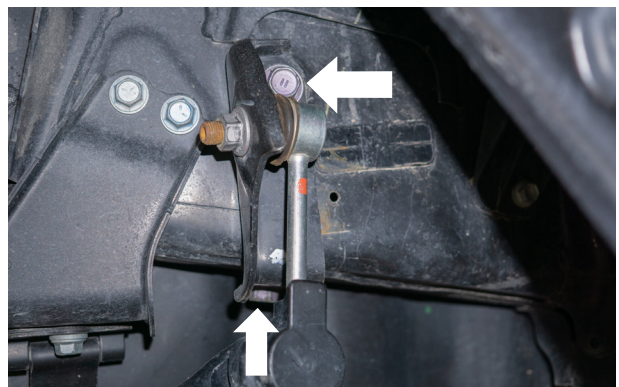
Remove the two sway bar bracket bolts (passenger side shown).
